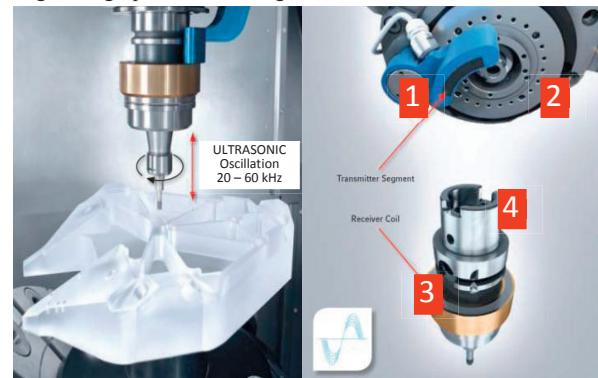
Typical machining situation with a glass work piece (left). Ultrasonic tool holder integration into a 5-axis machine tool (right): Inductive input coil (1) is mounted at the spindle nose (2) for non-contact transmission of electric energy to the tool holder's receiving coil (3) fixed at the rotary actuator (4)
